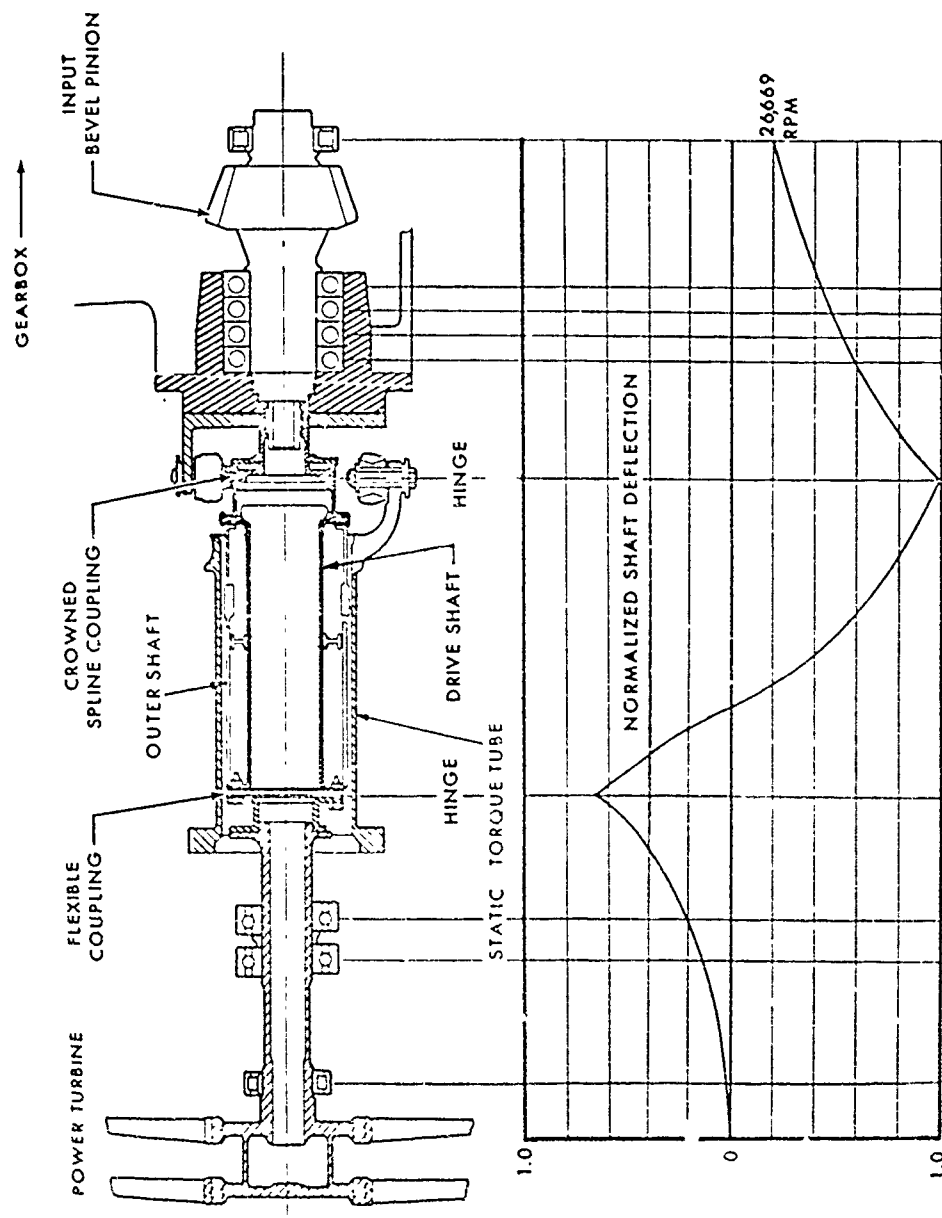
Input Drive Shaft Layout - Critical Speed Analysis.
